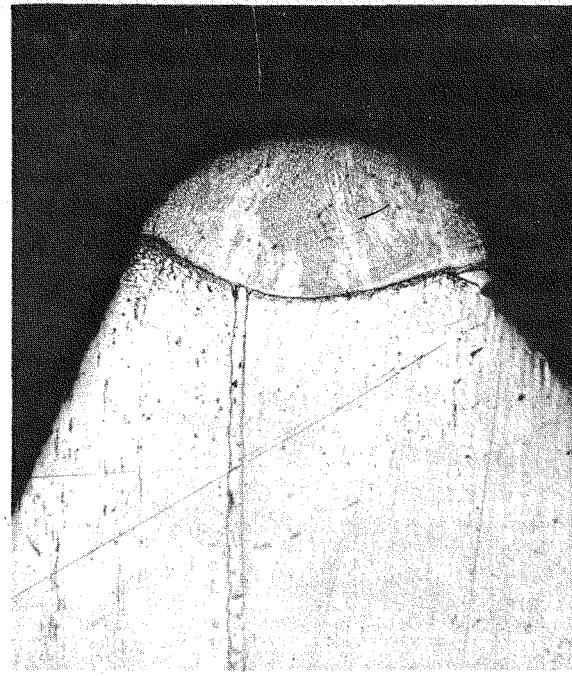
NICKEL STAINLESS STEEL WELD X 60
